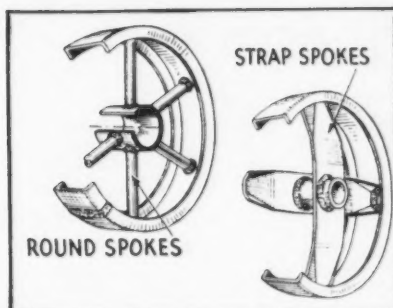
Low cost wheel is made with spokes formed from round bars or steel straps. Spokes are fillet welded inside the channel rim. Hub if required is produced from steel tubing.
